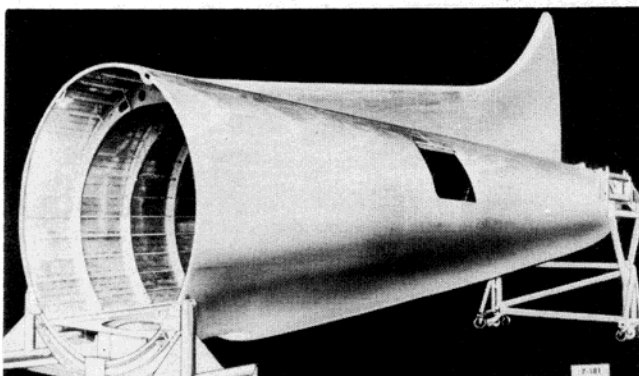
Fuselage Section Complete (Stations 6 to 11)
